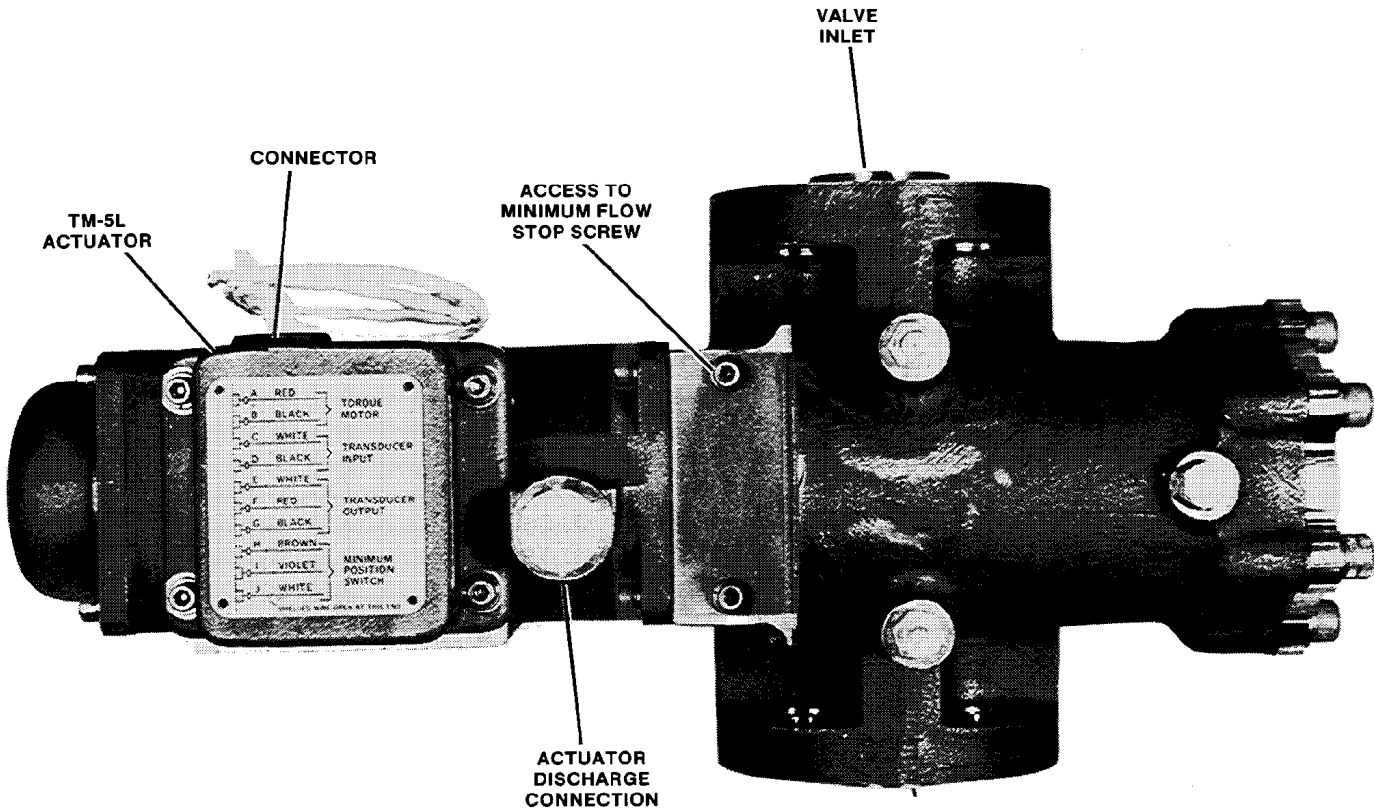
3151A Water Valve/TM-5L Integrating Actuator Assembly
